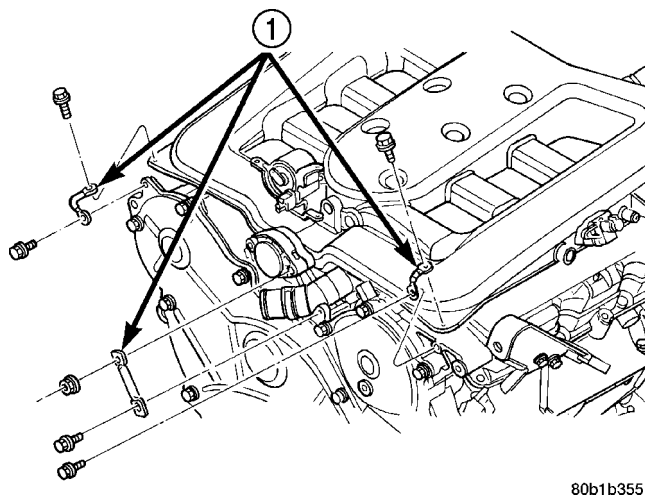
INTAKE MANIFOLD SUPPORT - RIGHT
